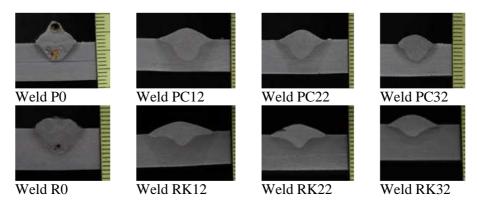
Macro sections of beads on plate welded with solid and rutile flux cored wire (plan of experiment from Tables 2 and 3)
